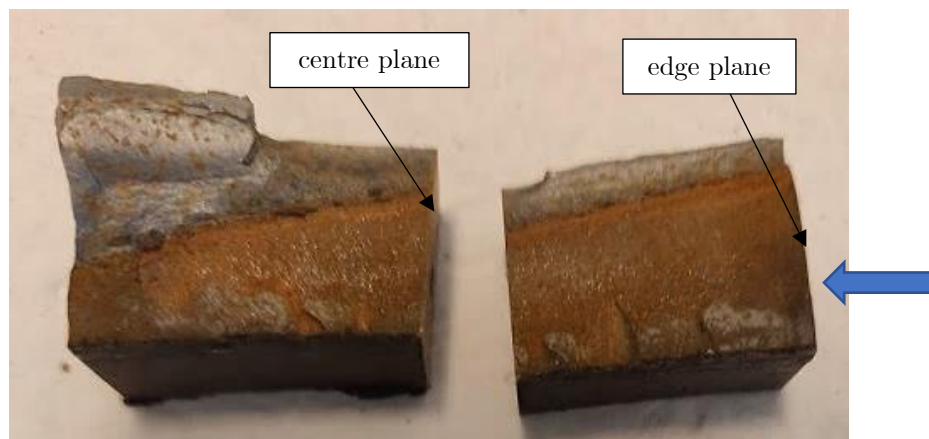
Halved fatigue cracked specimen, ready for polishing and etching. Blue arrow indicated the direction of observation.
